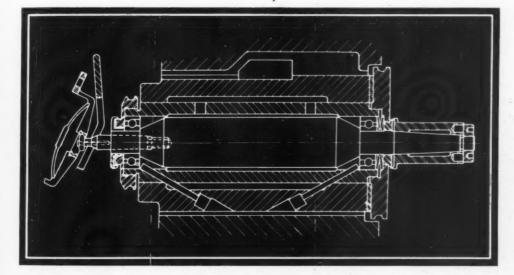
Left—Grinding wheel spindle utilizes Belleville springs to maintain even preload on bearings. Correct fits, low limit of runout, careful metering and filtering of oil are required for the high spindle speeds
